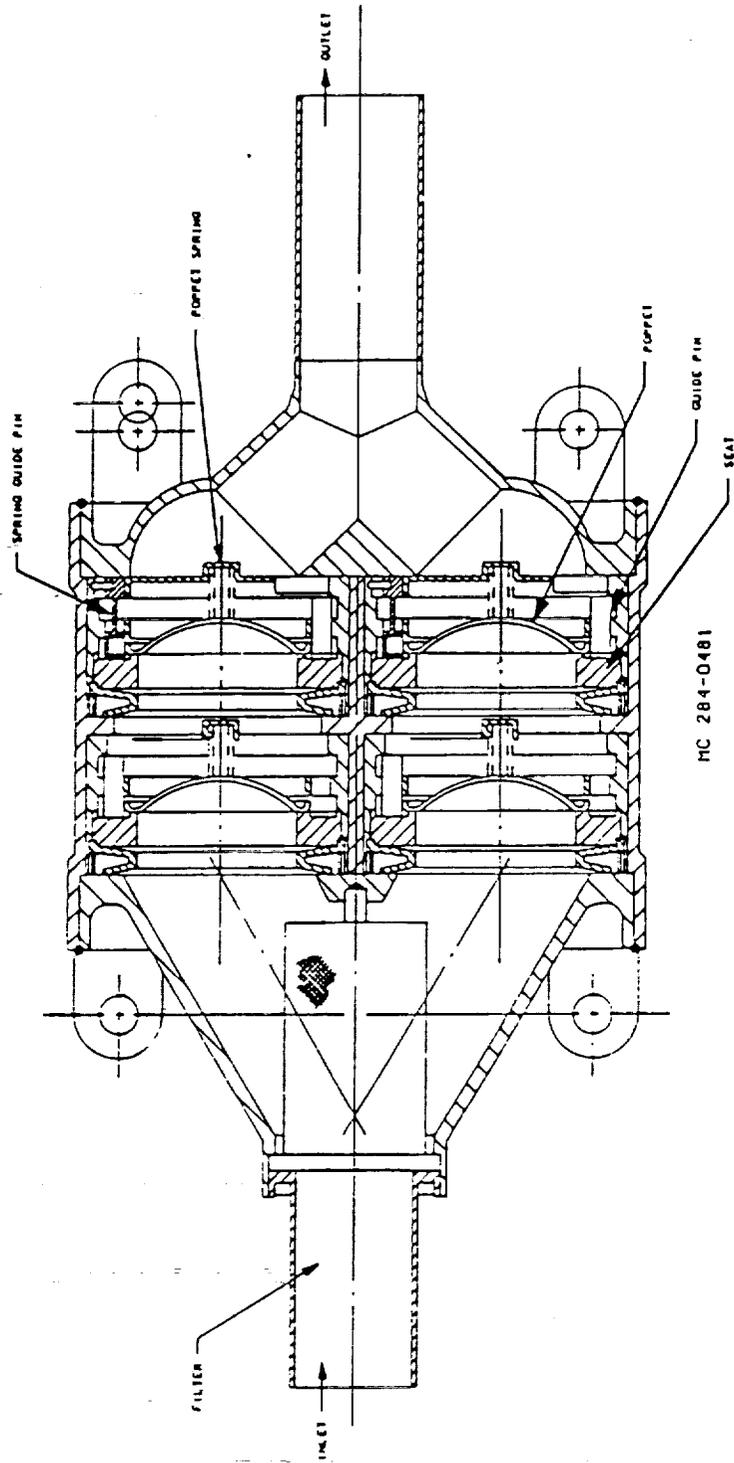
QUAD CHECK VALVE ASSEMBLY
